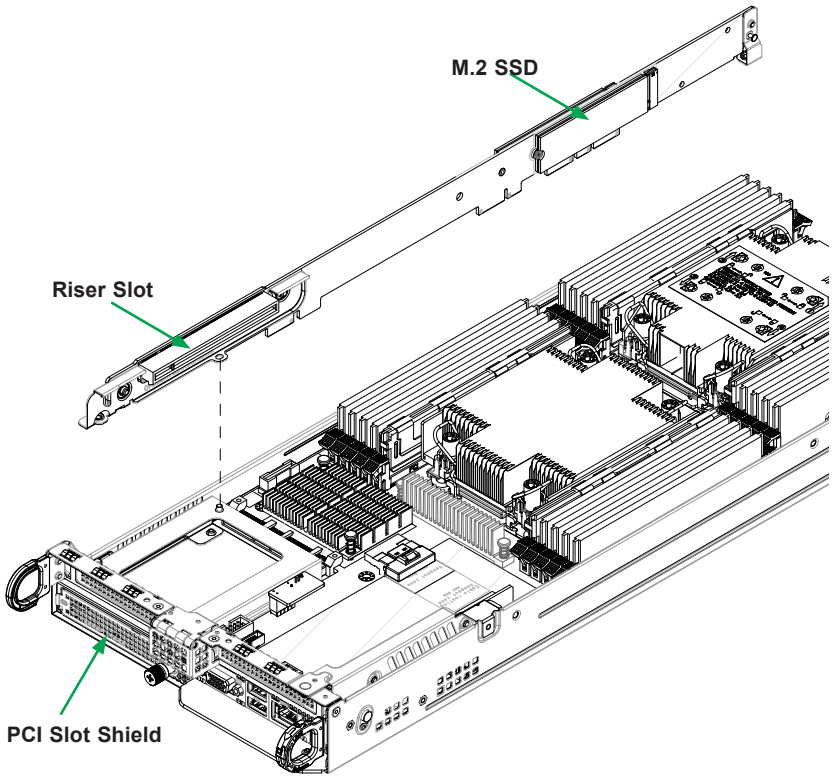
Installing Expansion Card onto M.2 Carrier-and-Riser Card
